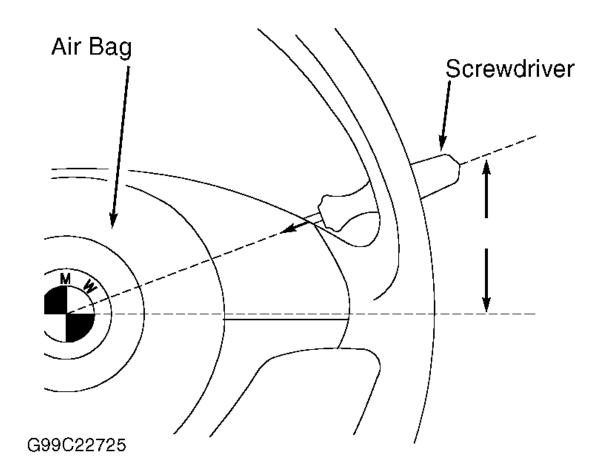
Inserting Screwdriver Behind Steering Wheel Courtesy of BMW OF NORTH AMERICA, INC.
